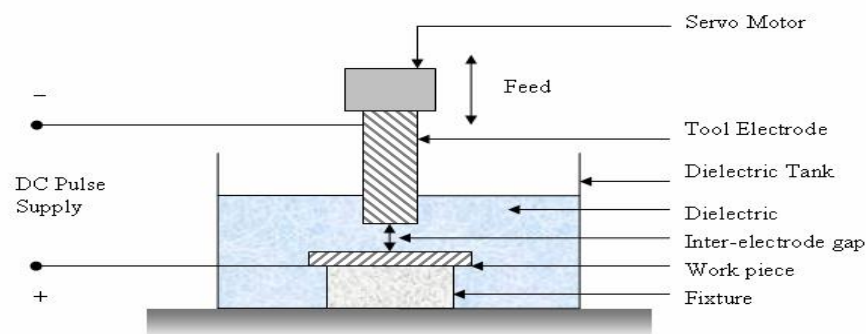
Schematic of an Electric Discharge Machining (EDM) machine tool
